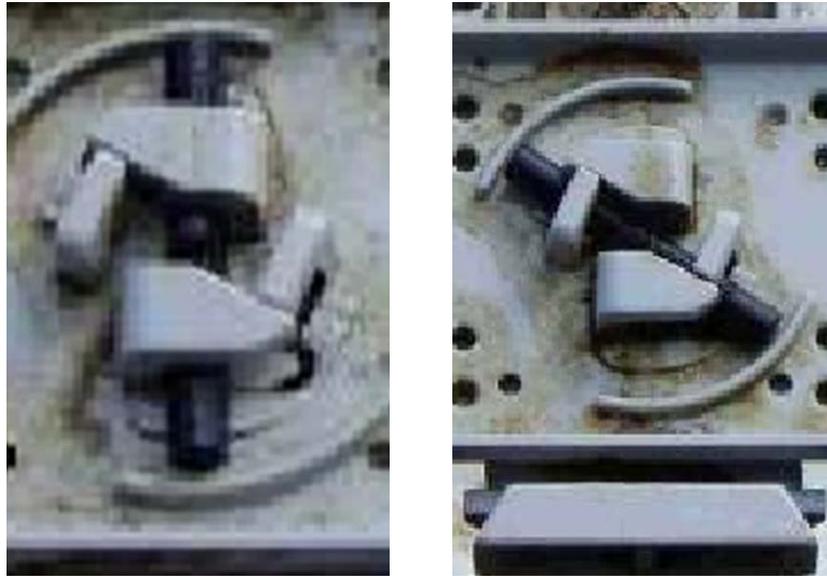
Locking Pin Locked (Left) & Unlocked (Right)
